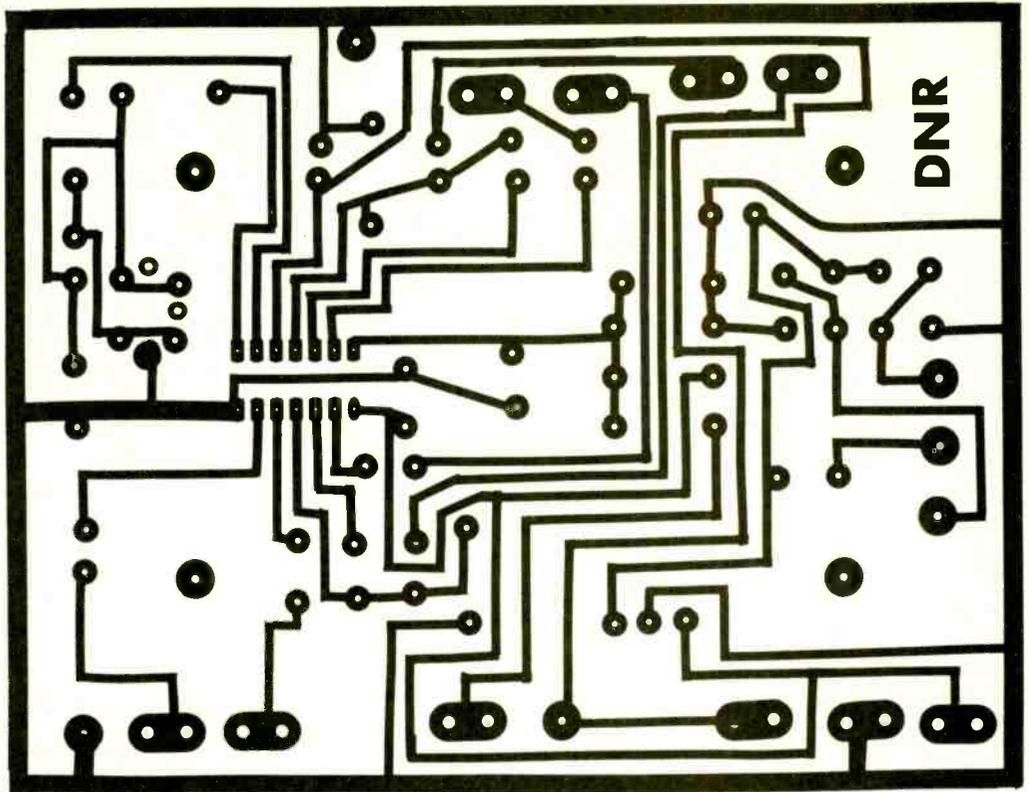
WIRING DIAGRAM of the main printed-circuit board for the DNR System. Uncrowded parts layout (shown with foil side down) assures successful assembly.
